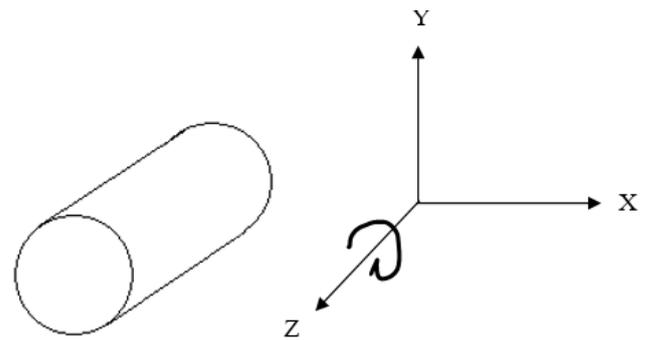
Degrees of Freedom of Cylinder Workpiece
